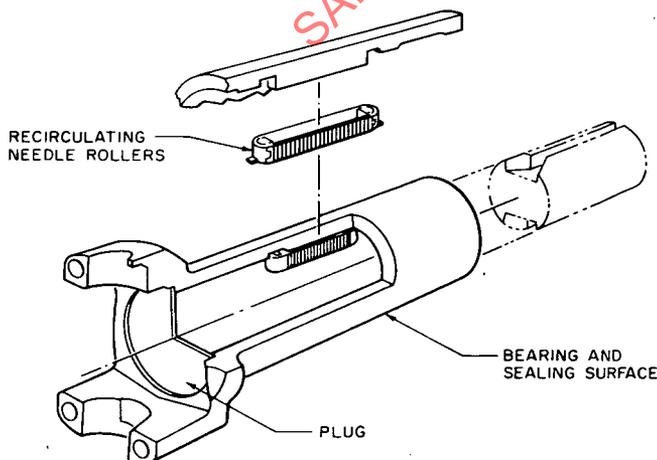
SLIP YOKE (RECIRCULATING NEEDLE ROLLER TYPE)
